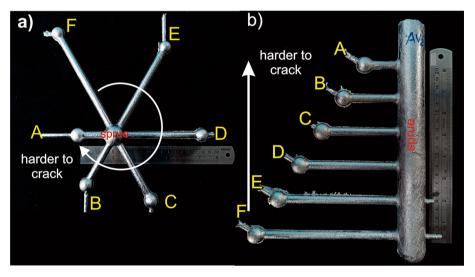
The sample cast products made from AI-12.5Cu that were produced using (a) horizontal CRC mold and (b) vertical CRC mold.
